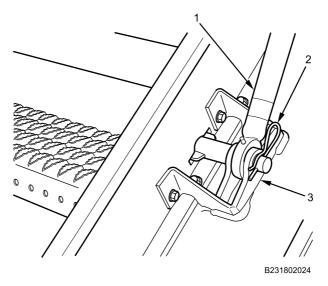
Locking Safety Pin Removed from Hydraulic Cylinder.
